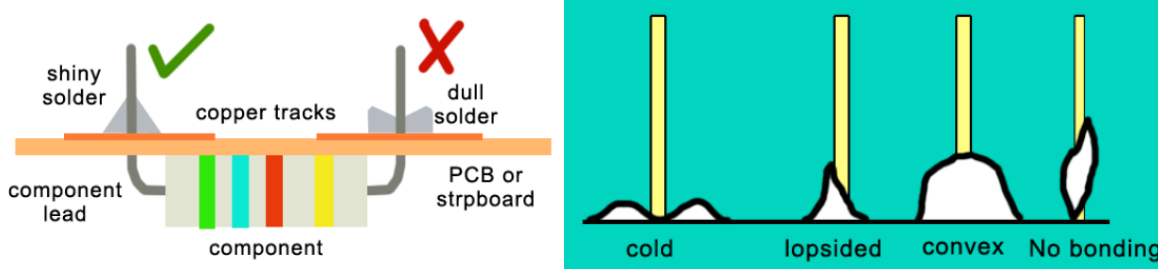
Examples of good and poor soldering technique (left) and typical bad or ‘dry’ joints when the component lead was not hot enough (right).
